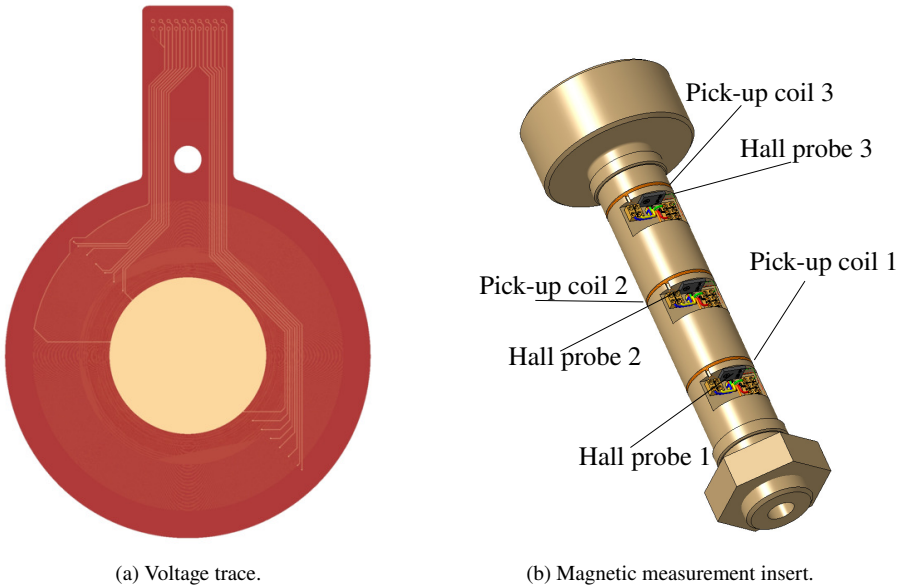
CAD renders of the the voltage trace and magnetic measurement insert.
